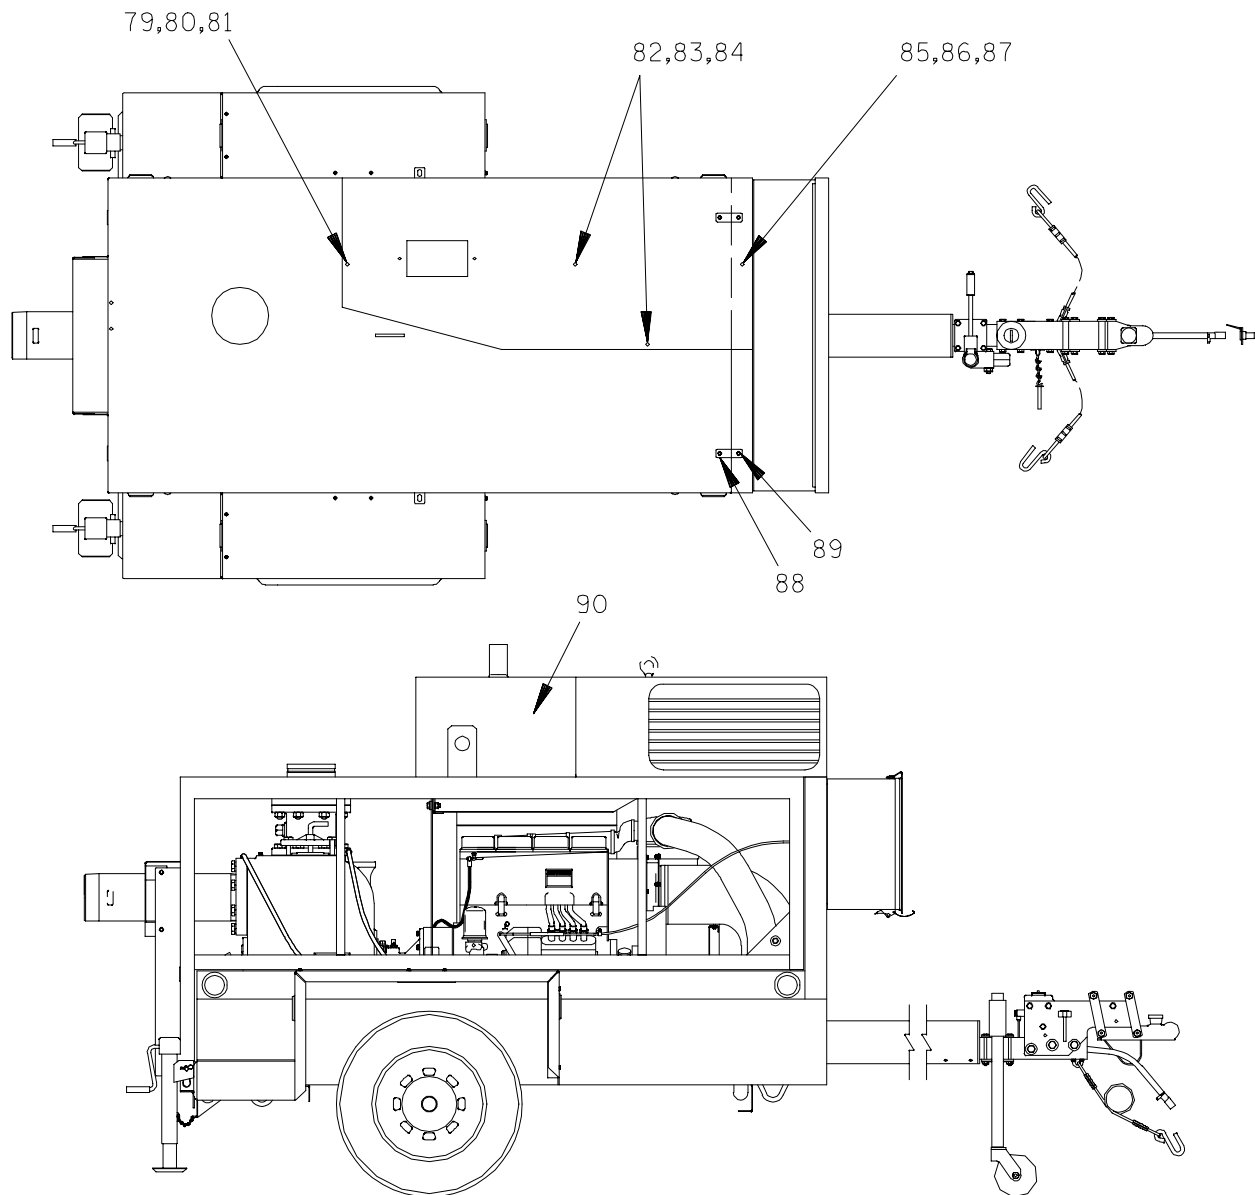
T6A3-F4L-SPA Pump Assembly (Cont'd)
